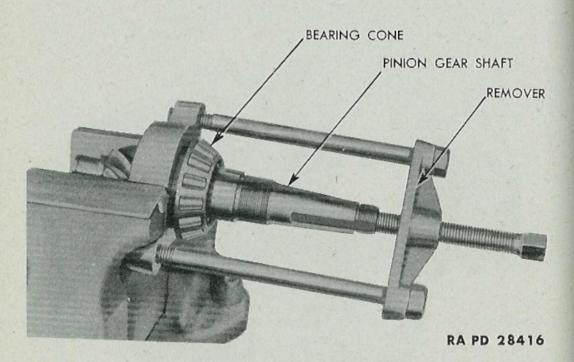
Removing Bearing Cone from Pinion Gear Shaft with Remover and Replacer 41-R-2385-135
